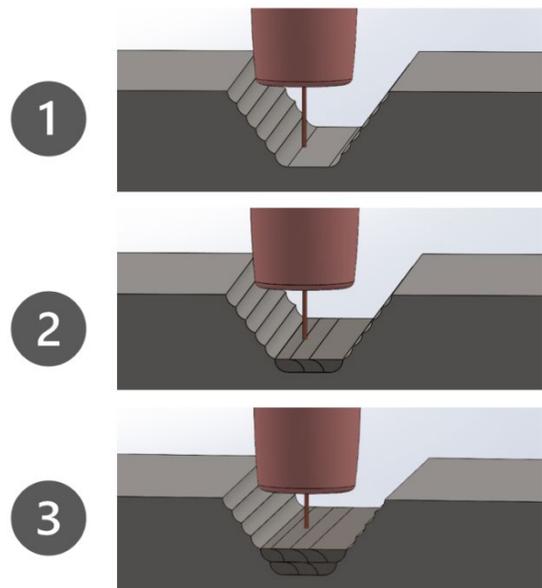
Cavity geometry and the weld filling strategy.
